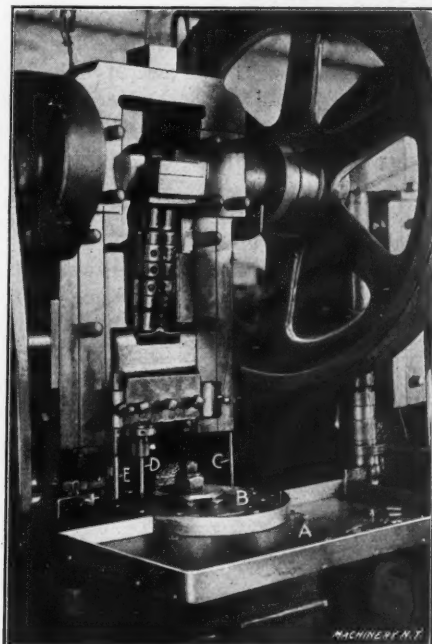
Swaging Machine for forming the Lead Filling and the Metal Case to the Desired Shape
